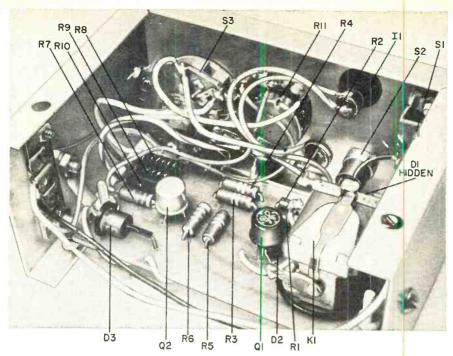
Although printed circuit board construction is shown, circuit is simple enough to be assembled with point-to-point wiring. Terminal strip at left is for power inputs.
